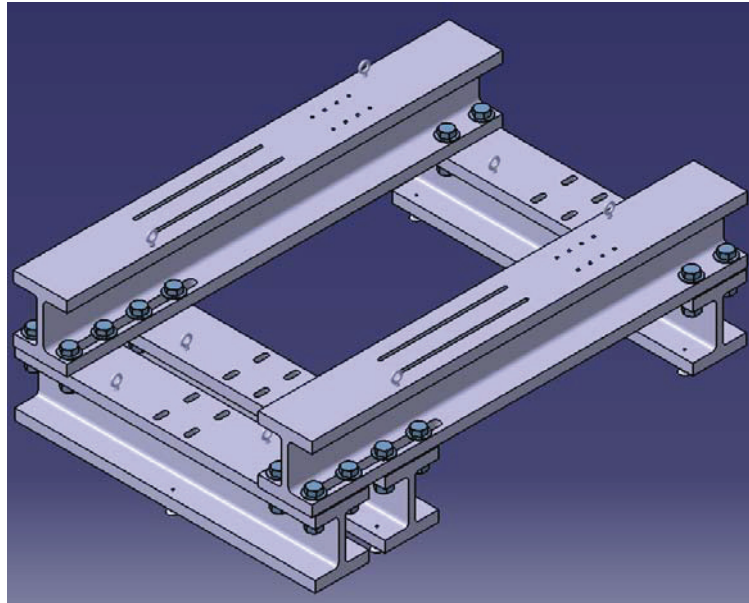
4.2.6 Installation Spacer Beams inside the assembly
